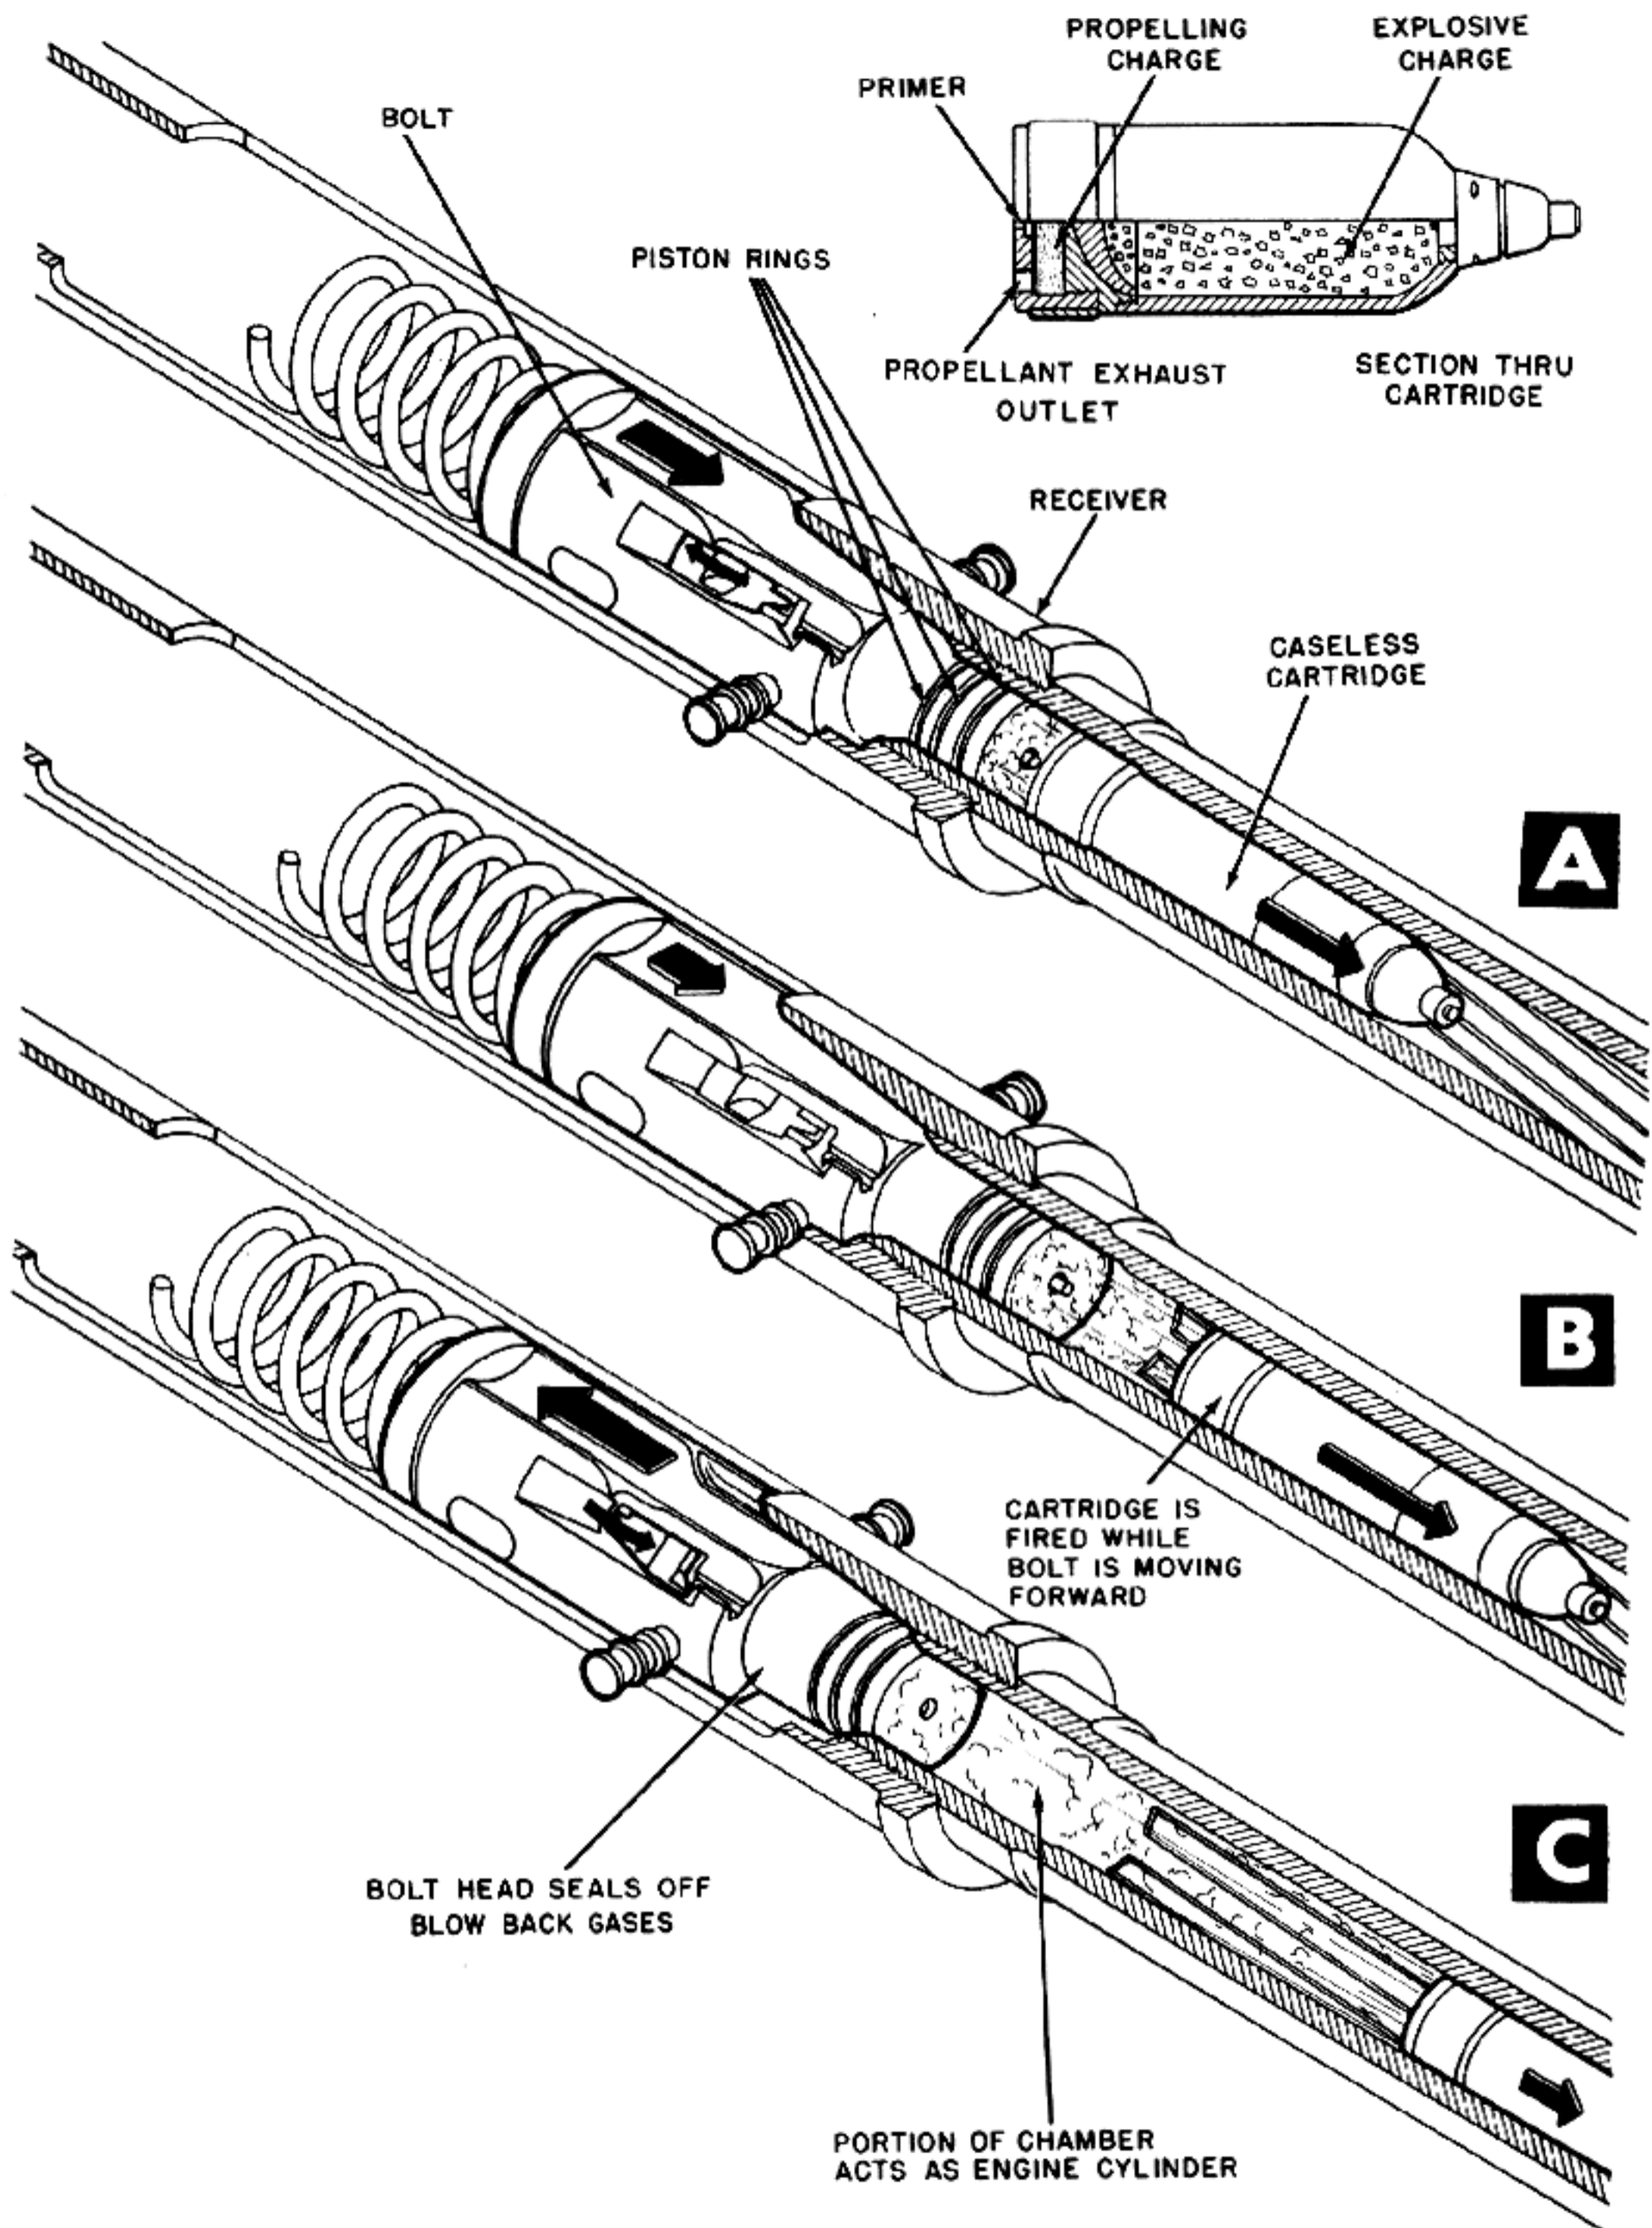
Piston Rings on Bolt Seal Bore. Complete Round Fired From Gun, Eliminating Extraction and Ejection.
